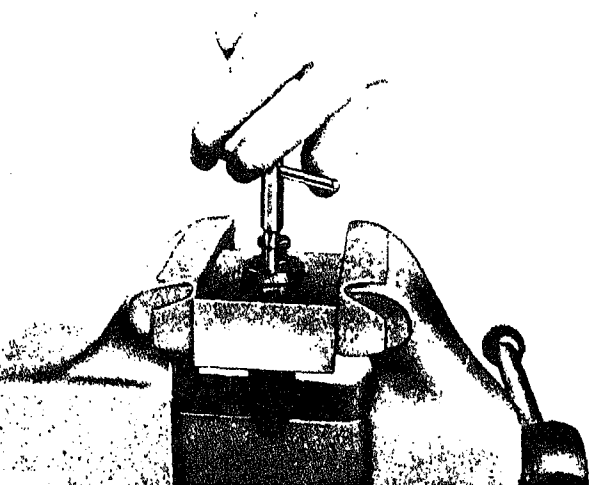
Cutting ball seat with ST-955 ball seat cutter
